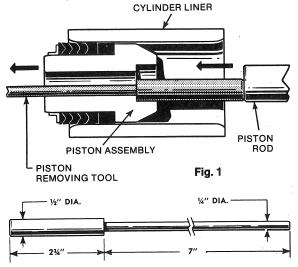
Suggested tool for removing V-Ring plunger assembly.
